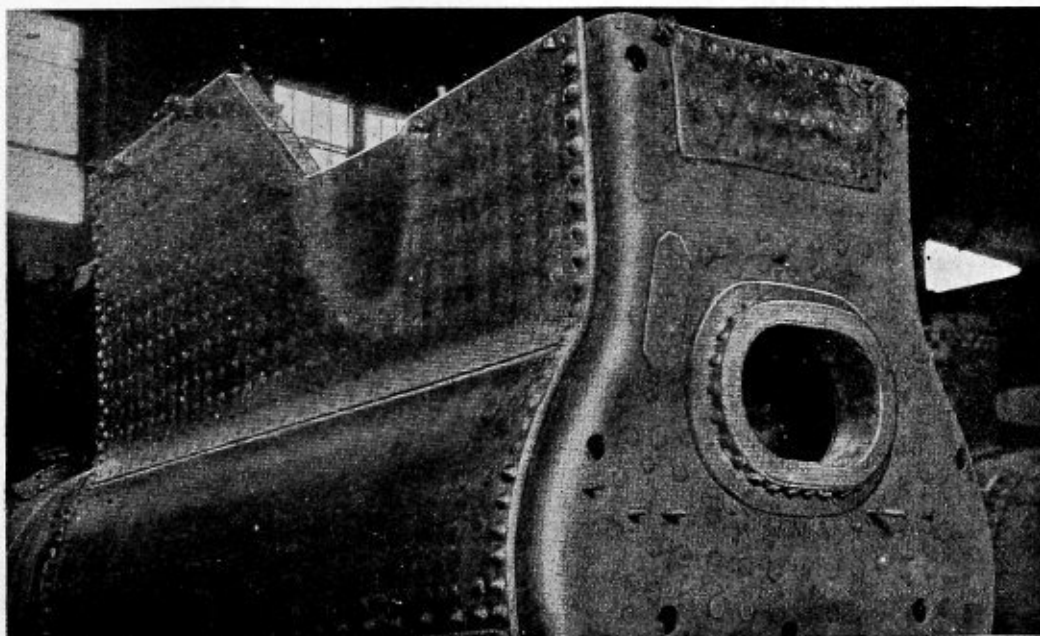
Locomotive Boiler Being Changed to Stationary Type, New Half Side Sheets and Patch in Door Sheet; Work Done by Electric Arc Welding
